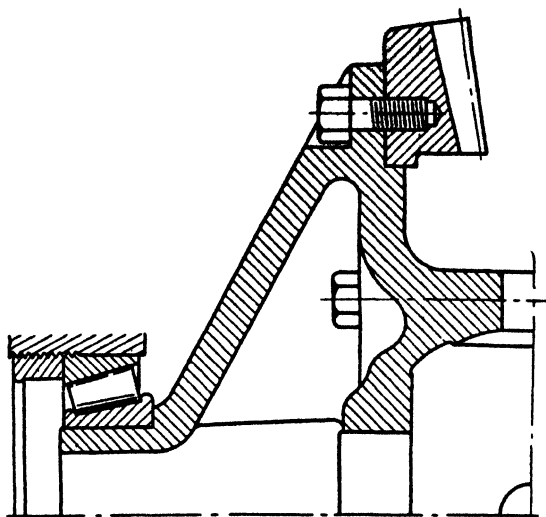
SPIRAL BEVEL GEAR ASSEMBLY COMPRISING A "WEBLESS" RING GEAR.
